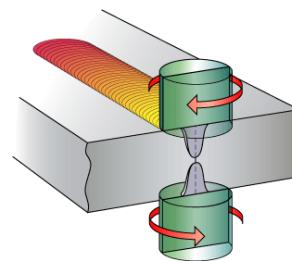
Double Sided Friction Stir Welding tool
